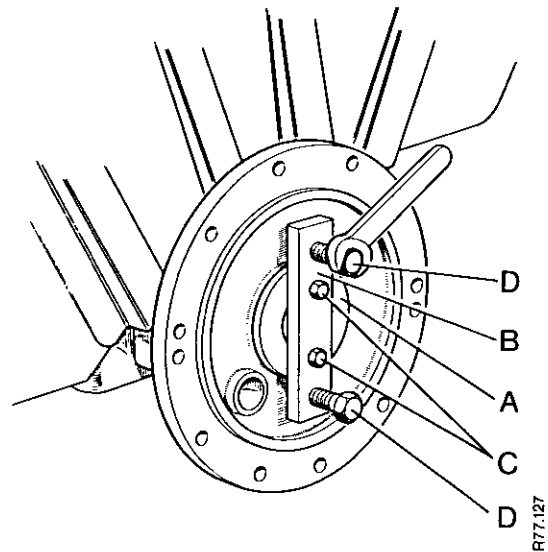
REMOVING OIL SEAL HOUSING FROM AXLE CASE
